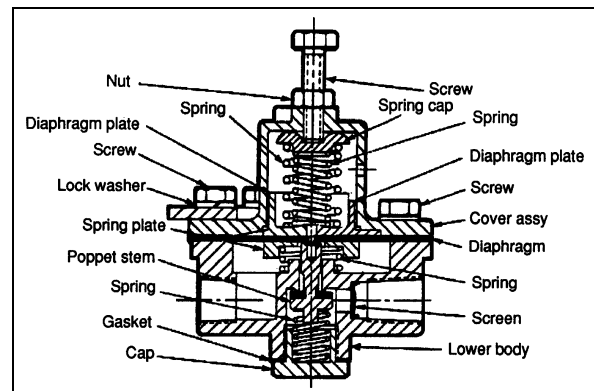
AIR PRESSURE REGULATING VALVE 12037
